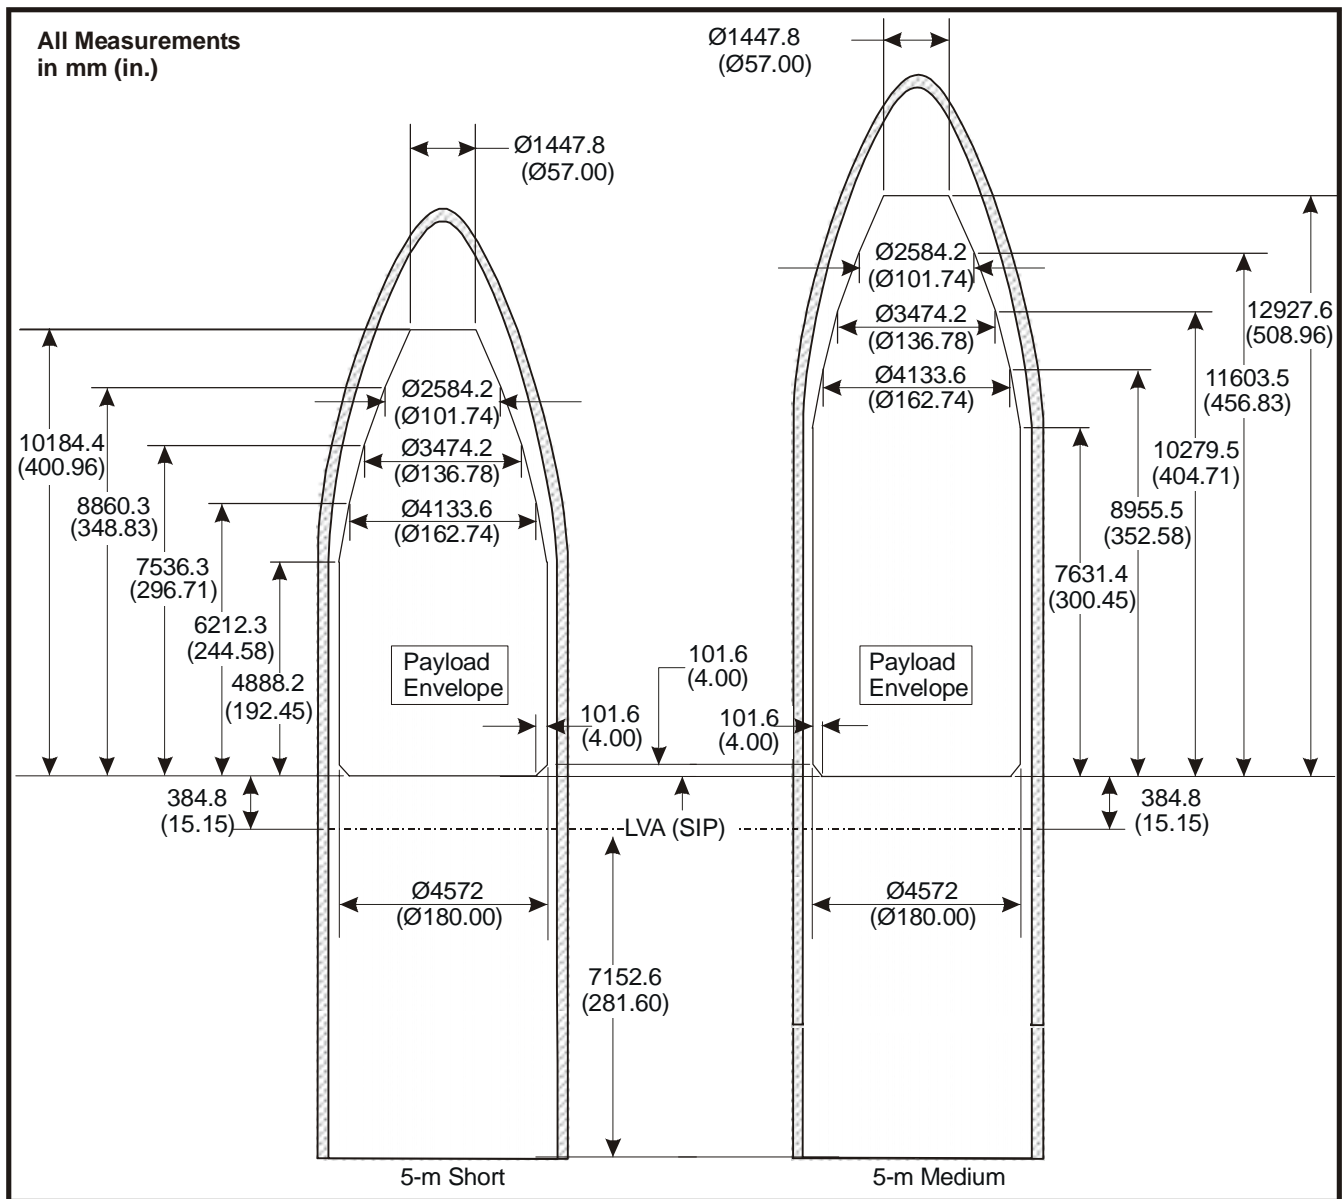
Atlas 5-m PLF Static Payload Envelope
